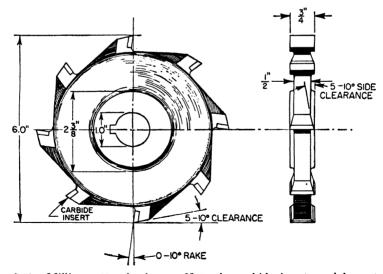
Milling cutter for brass. Note the carbide inserts and large teeth.
